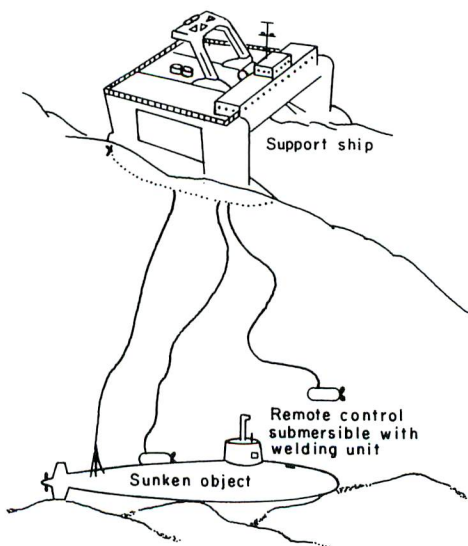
Lifting sunken ships in ocean salvage operations is one expected application for integrated underwater welding systems.
